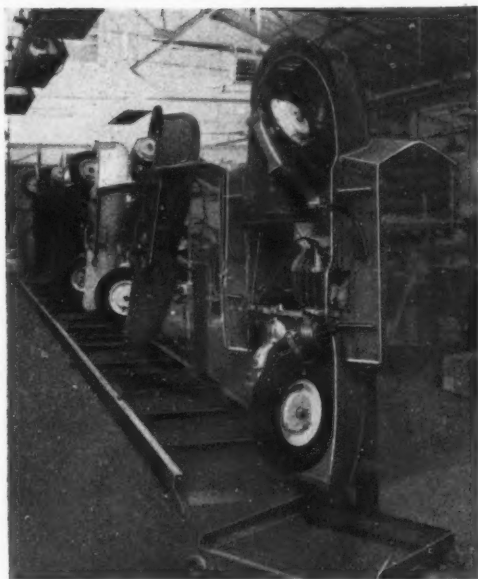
A View of the Assembly Line, Showing the Track and Special Fixtures for Supporting the Scooters
